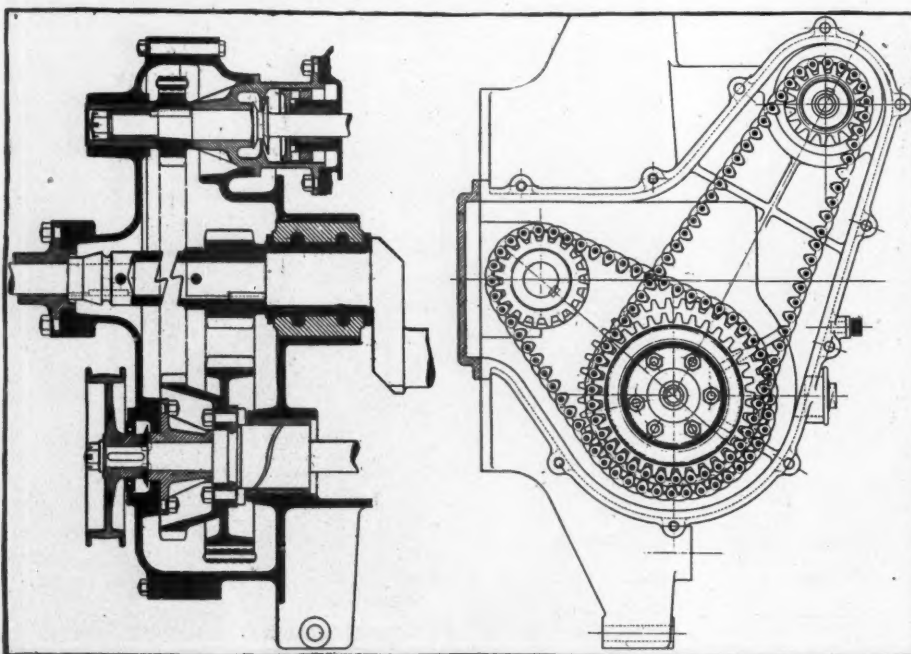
VERTICAL SIDE SECTION AND END VIEW OF CROSSLEY MOTOR BUILT FOR USING SILENT CHAIN DRIVE FOR CAMSHAFTS, MAGNETO AND PUMP SHAFTS
